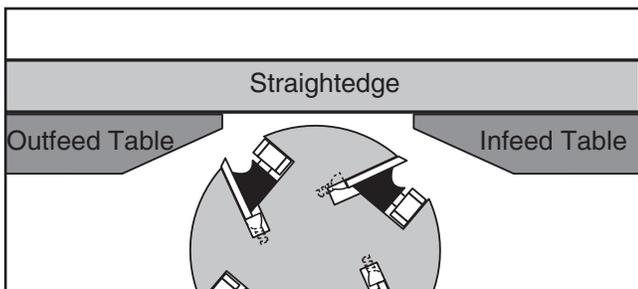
Infeed and outfeed tables set evenly (knife-style cutterhead shown).
